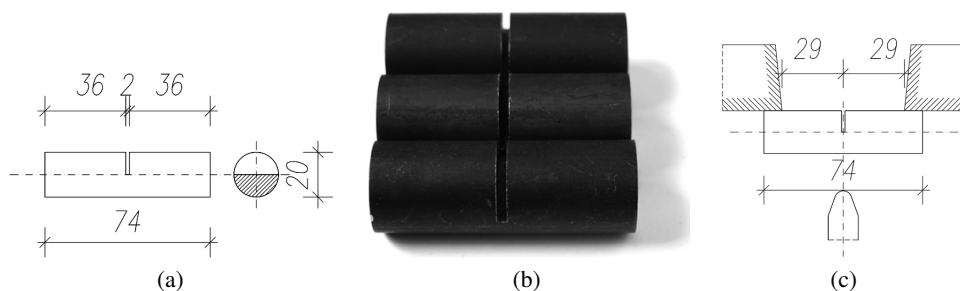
Specimens for impact resistance tests: (a), (b) specimen geometry, (c) method of supporting the specimen and the adopted distance between the Charpy pendulum hammer supports
